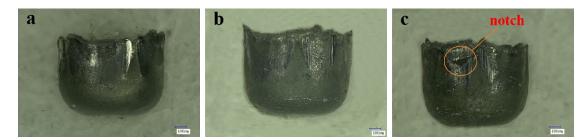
Side shape of annealed micro-deep drawing cup specimen: (a) 950°C, (b) 1050°C, (c) 1100°C
